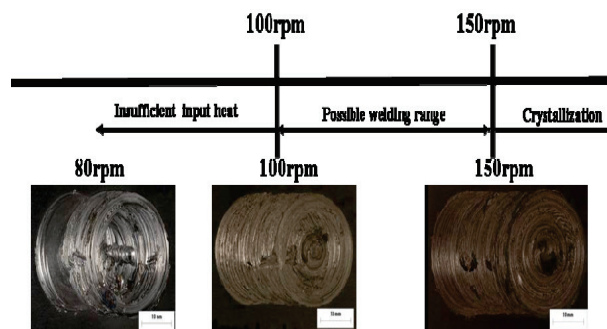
Possible welding range and surface appearance for 2 mm thick Zr55Cu30Al10Ni5 bulk metallic glass. (Ji et al. 2009)
